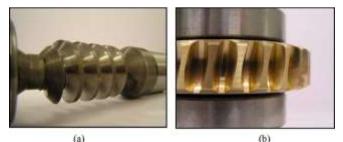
(a) The new worm screw gear (b) the new crown gear.
